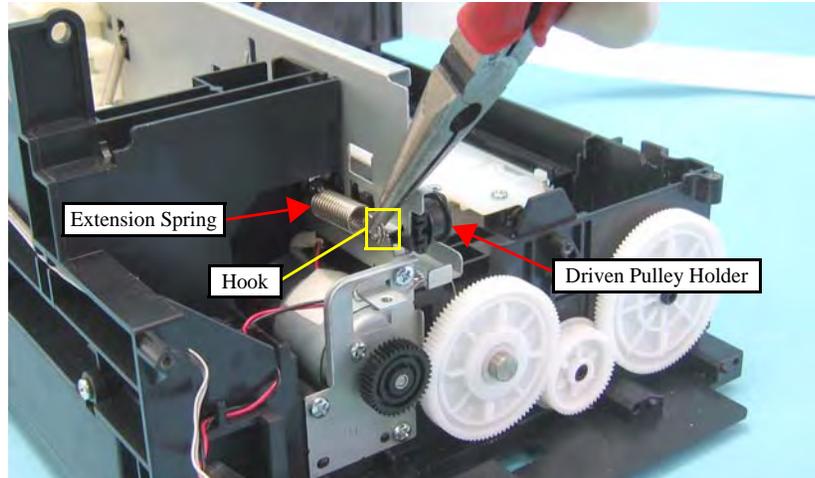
Removing the Extension Spring and Driven Pulley Holder
